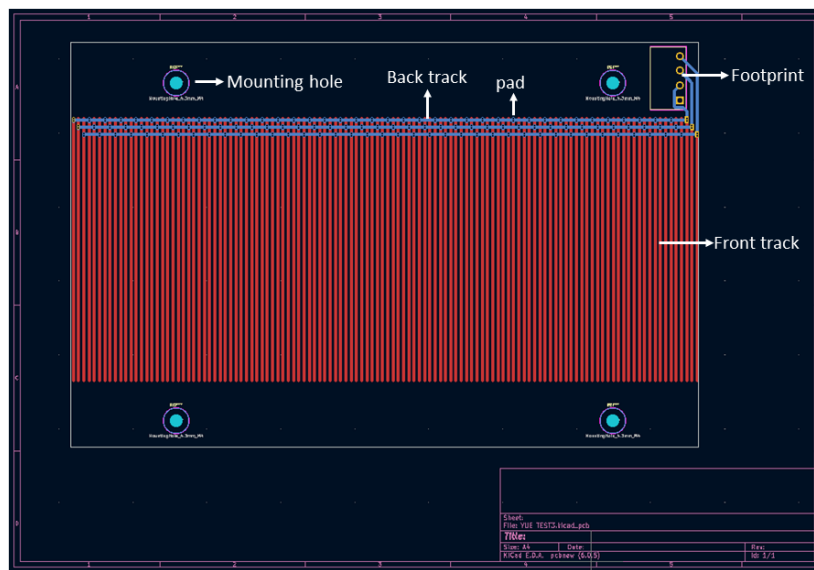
The design of PCB using Kicad and description of each components (the length of electrodes in this example is 90 mm).
